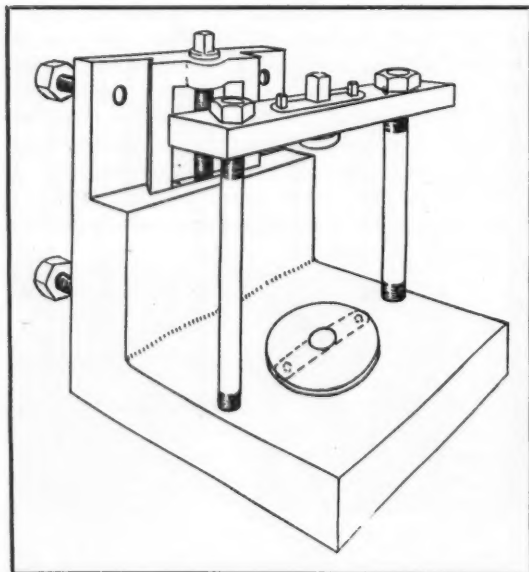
A simple form of jig for drilling the piston bosses. The bottom is provided with a fitting which accommodates the same stepped rings which are later used for holding the piston during the turning operation. Both the upper and lower holding devices of this jig are adjustable to allow for drilling pistons in which the bosses are offset. There are many modifications applied to jigs of this type many of which are much more elaborate than the one shown above.
